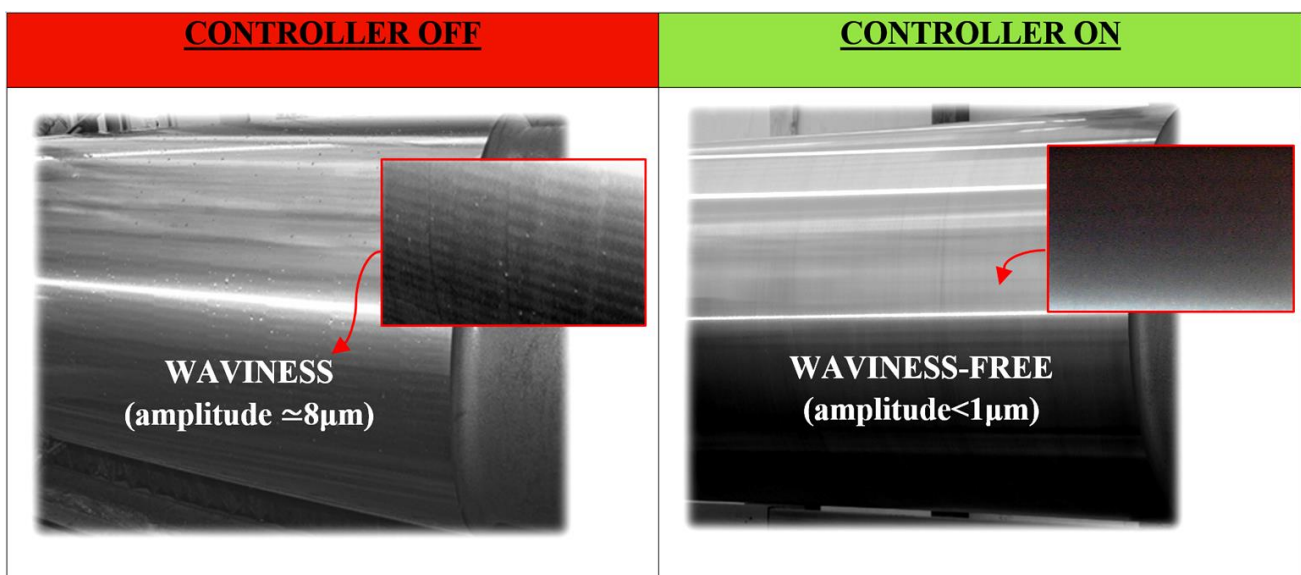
Workpiece surface finish after the application of the controller (Test ID6).
